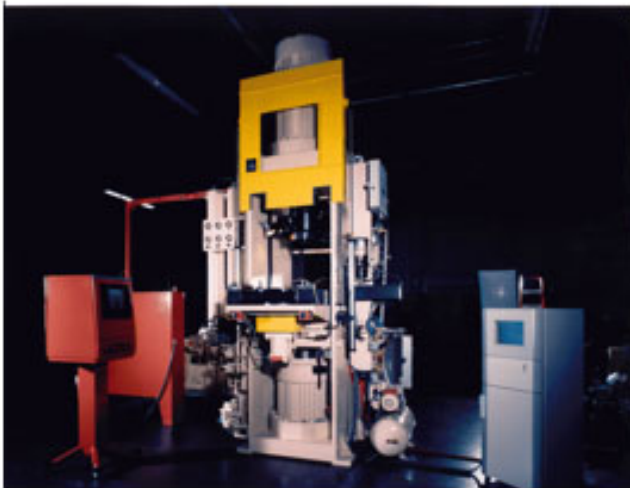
A 200T THT SLC casting cell and SiBloy® SSM castings produced.
